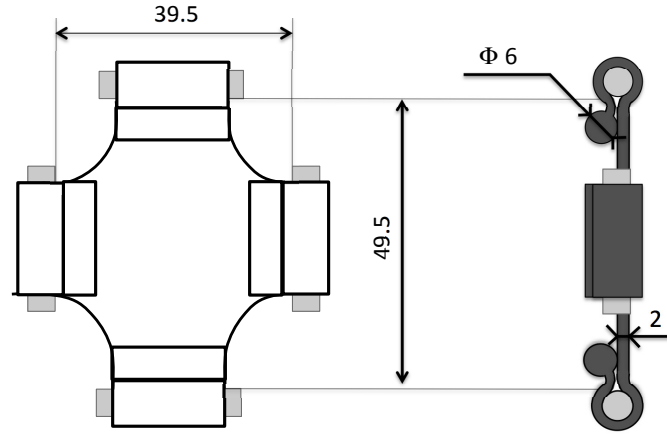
Specimen geometry for the biaxial test (dimensions in mm)
